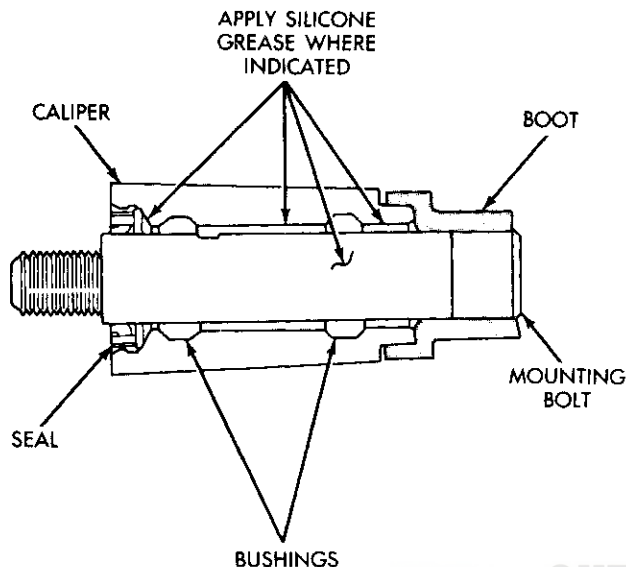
Mounting Bolt Lubrication (75mm Caliper)
